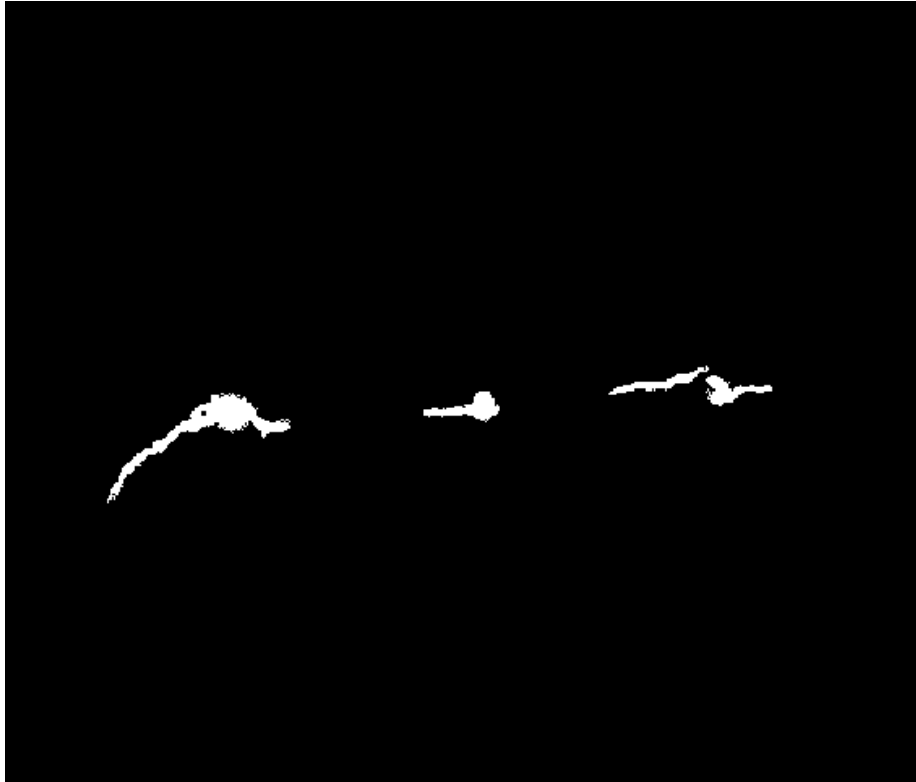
Defective weld segmented with region growing using a threshold of 50
